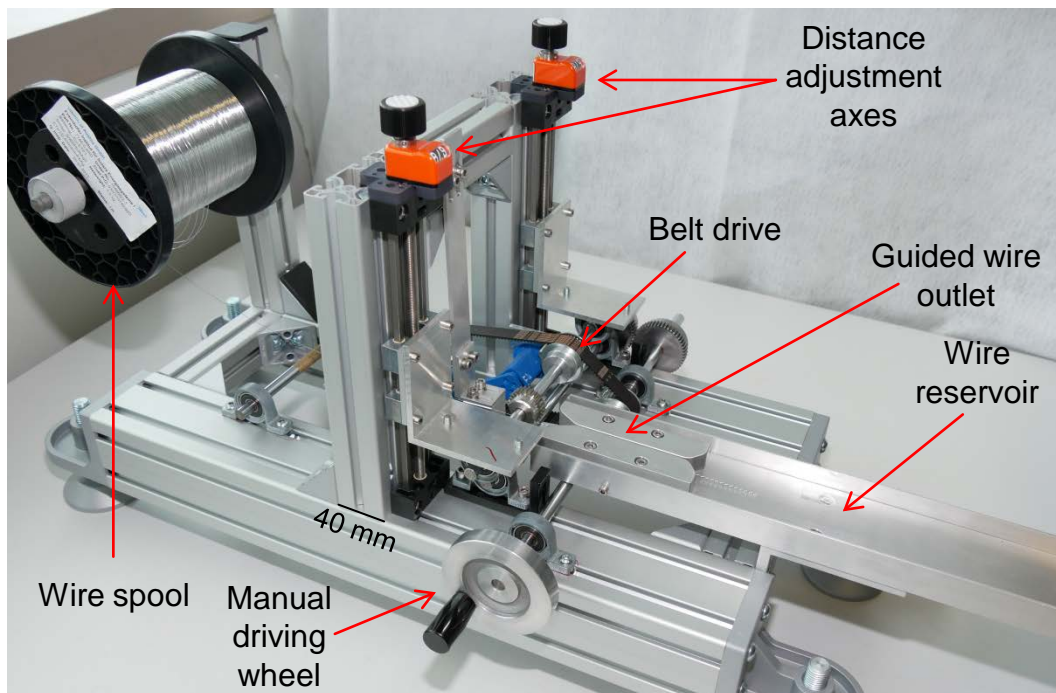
Photograph of Machine 3 (improved setup of Machine 2) to test wave-shaping using Method 3 (toothed wheel + toothed wheel)
